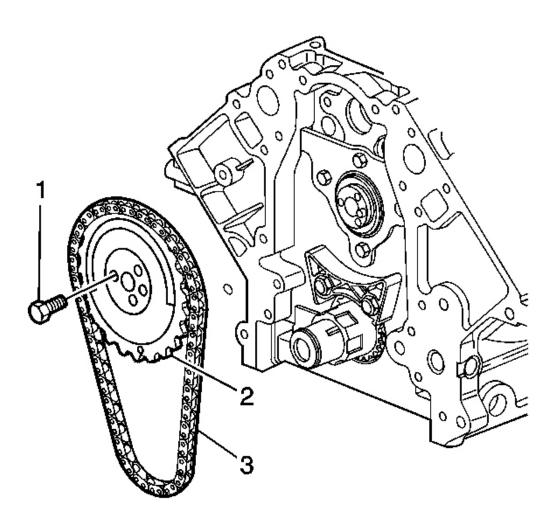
Camshaft Sprocket & Timing Chain Courtesy of GENERAL MOTORS CORP.
